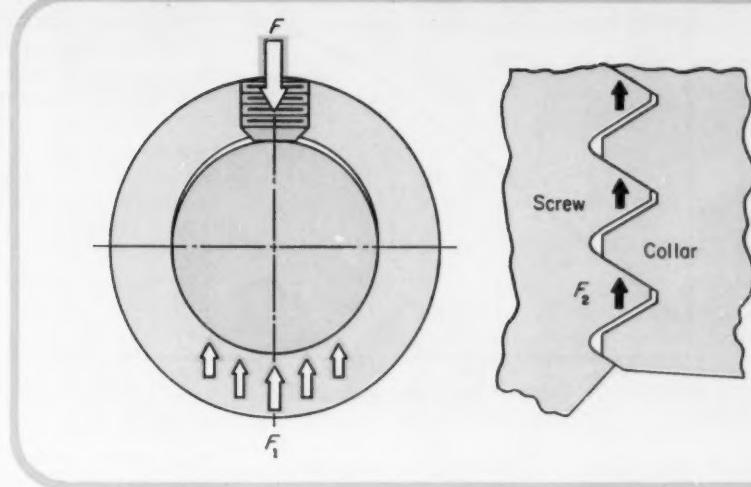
Shaft and collar assembly shows forces developed in typical set screw installation.
